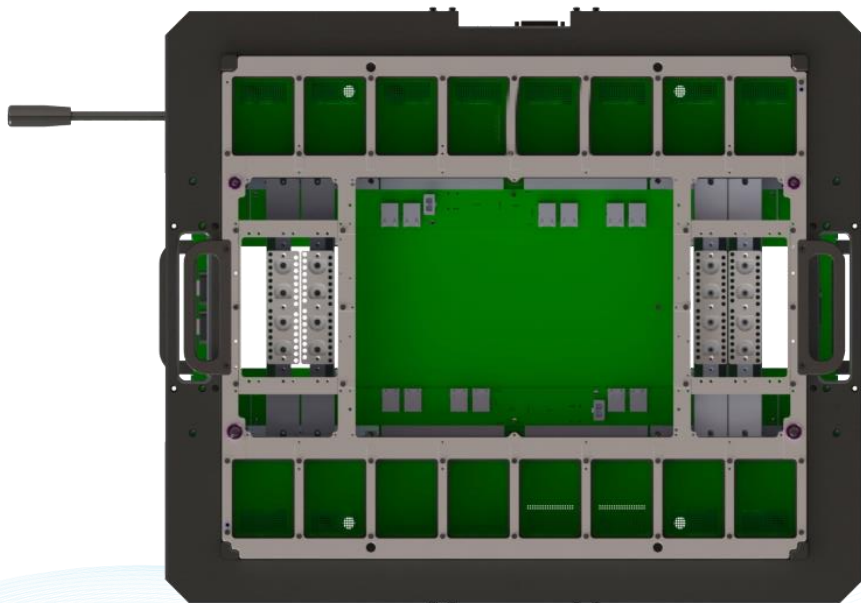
Four ML cassettes mounted in an Advantest V93K HSIO test head extender frame
